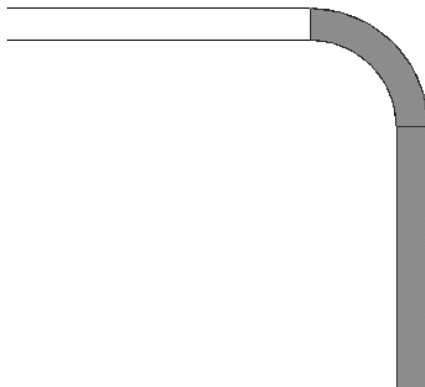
Edge flange created with the Bend Outside button chosen
